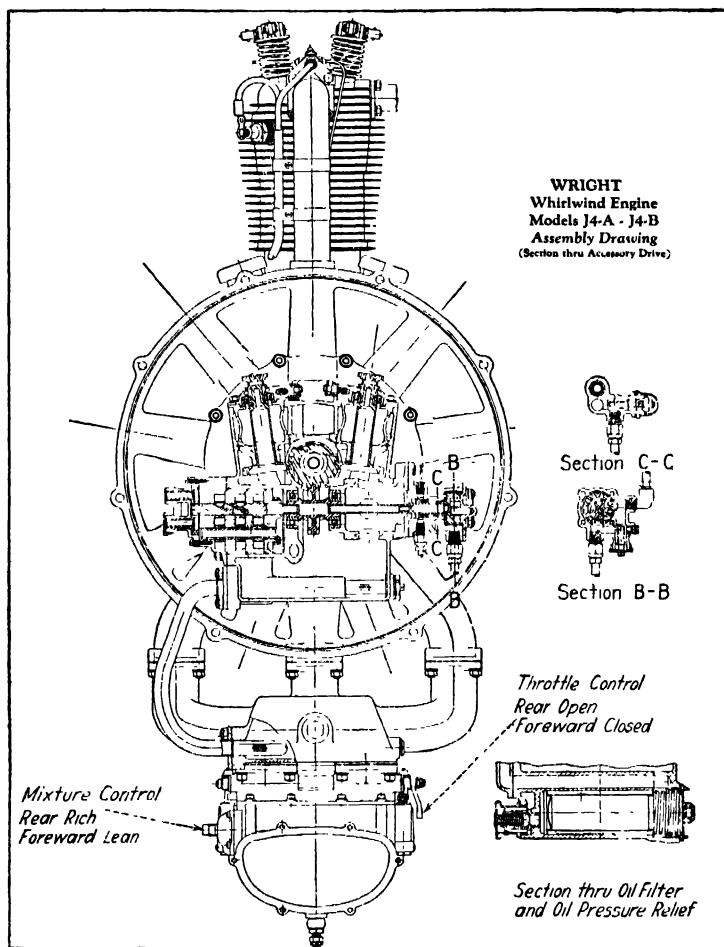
Assembly Drawing Showing Section Through Accessory Drive of Wright Models J4A and J4B Engines.
